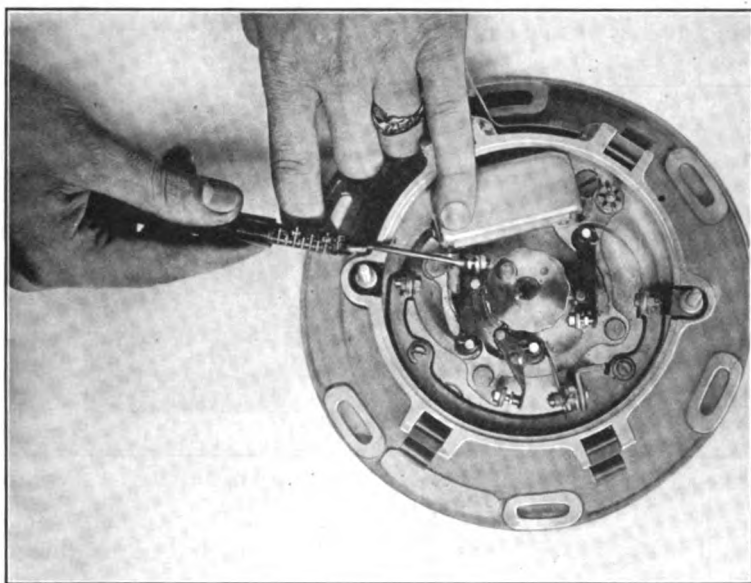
Adjustment of Liberty breaker—spring tension.
